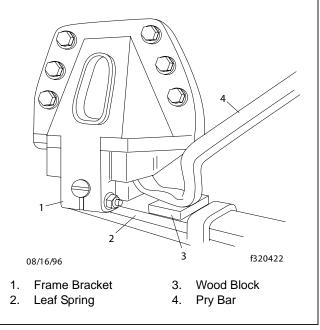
Hendrickson RTE Series Frame Bracket Inspection
